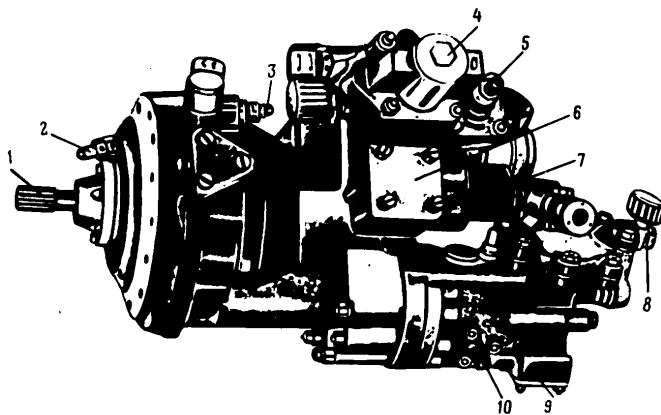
HP-11BA Unit. View on Fuel Supply Connection
